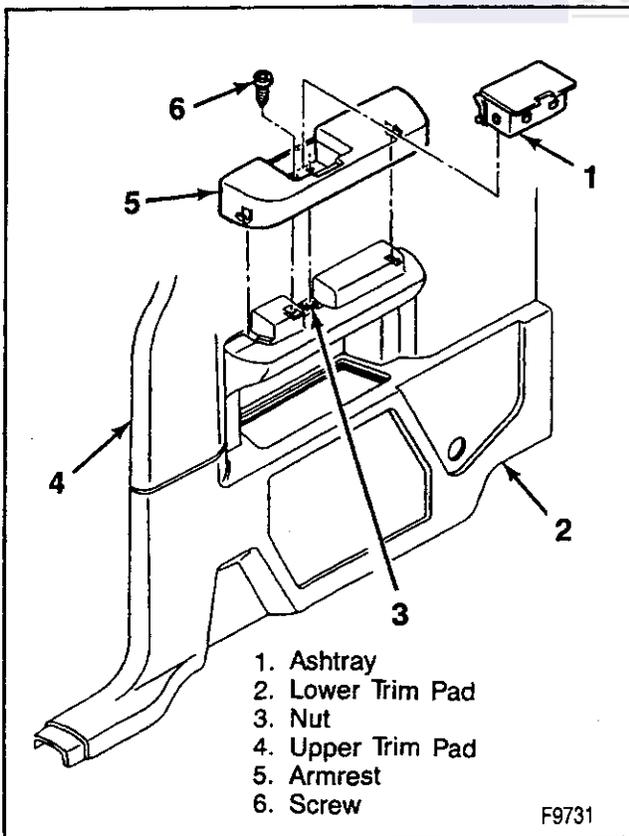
Side Rear Lower Panel (Extended Cab with Armrest)
